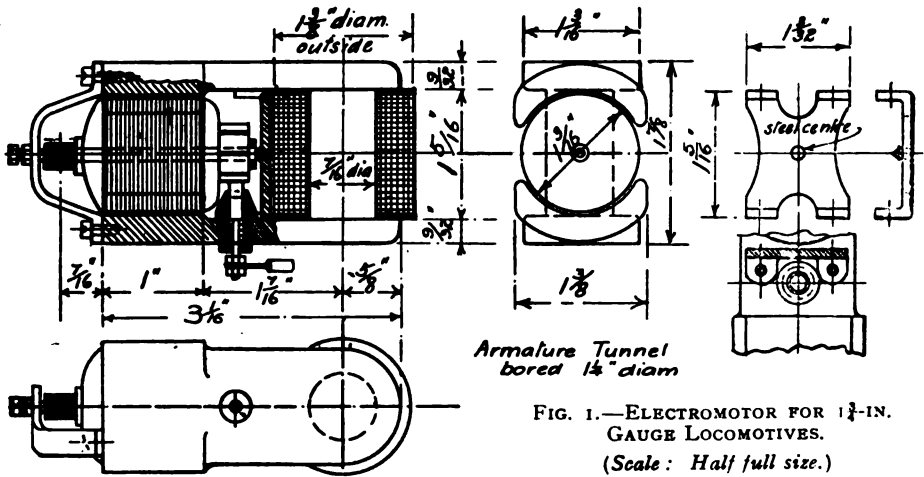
ELECTROMOTOR FOR $1\frac{1}{2}$ -IN. GAUGE LOCOMOTIVES. (Scale: Half full size.)
